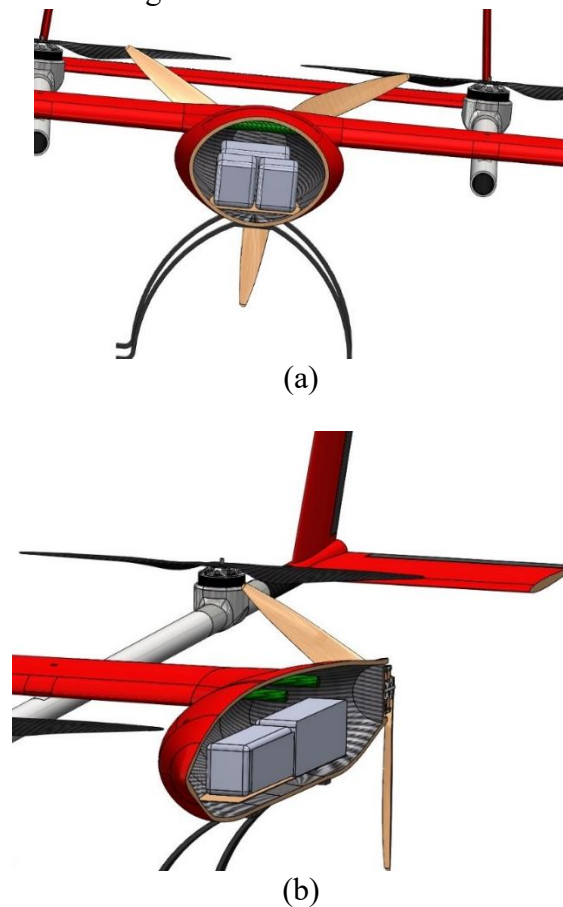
Cross-section view of batteries inside the fuselage. (a) Front cut; (b) side cut.
